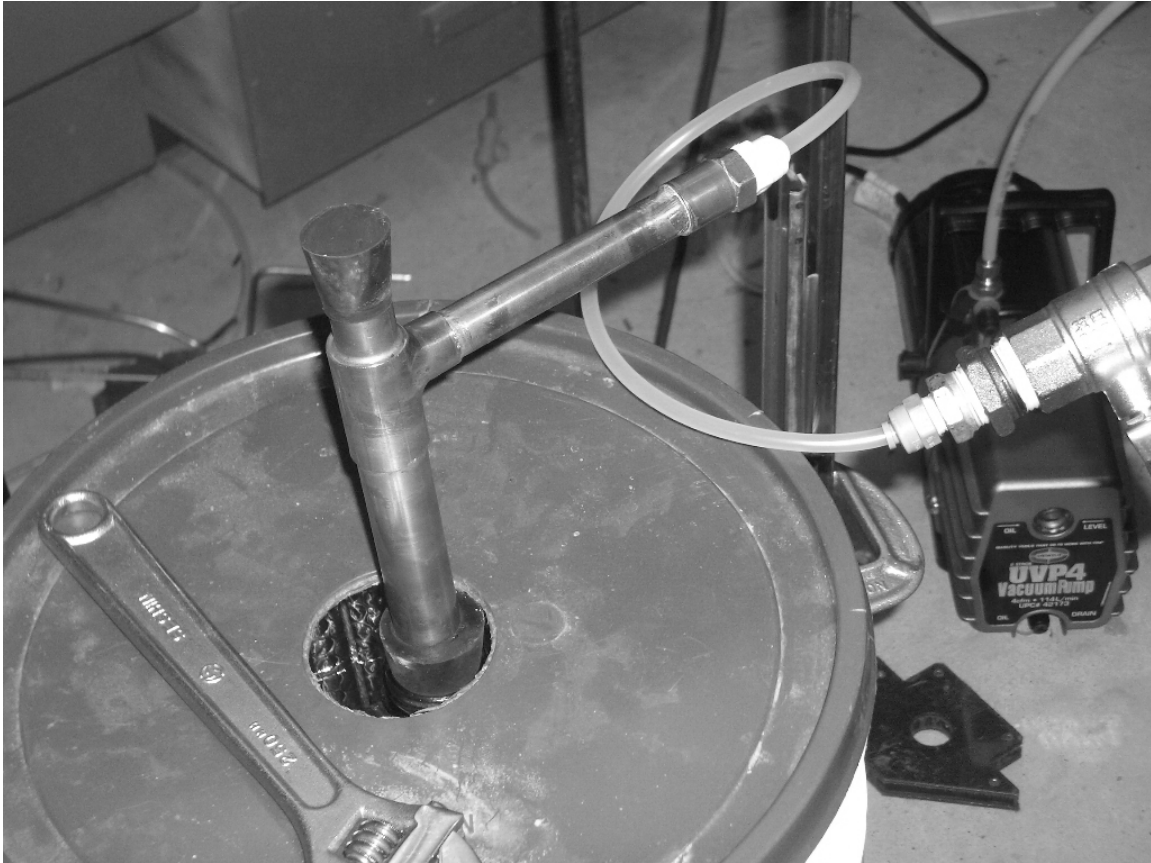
Testing vacuum integrity of vacuum manifold solder joints.
